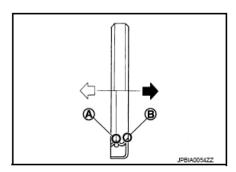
Identifying Position Of Installing Rear Oil Seal Courtesy of NISSAN MOTOR CO., U.S.A.
